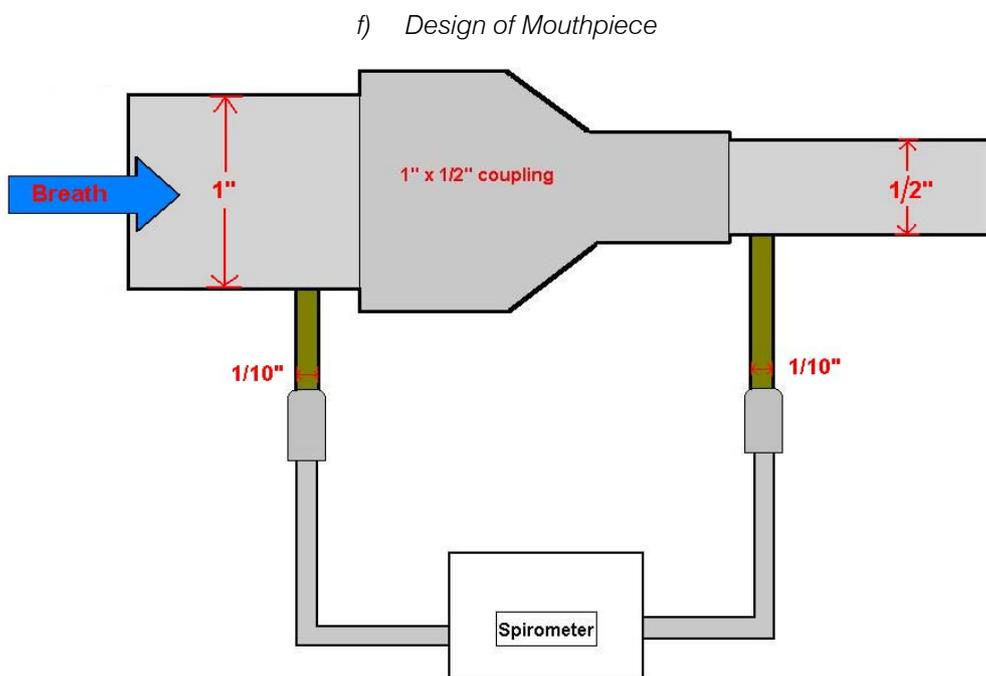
(a) : Illustration depicting the designed mouthpiece with dimensions
